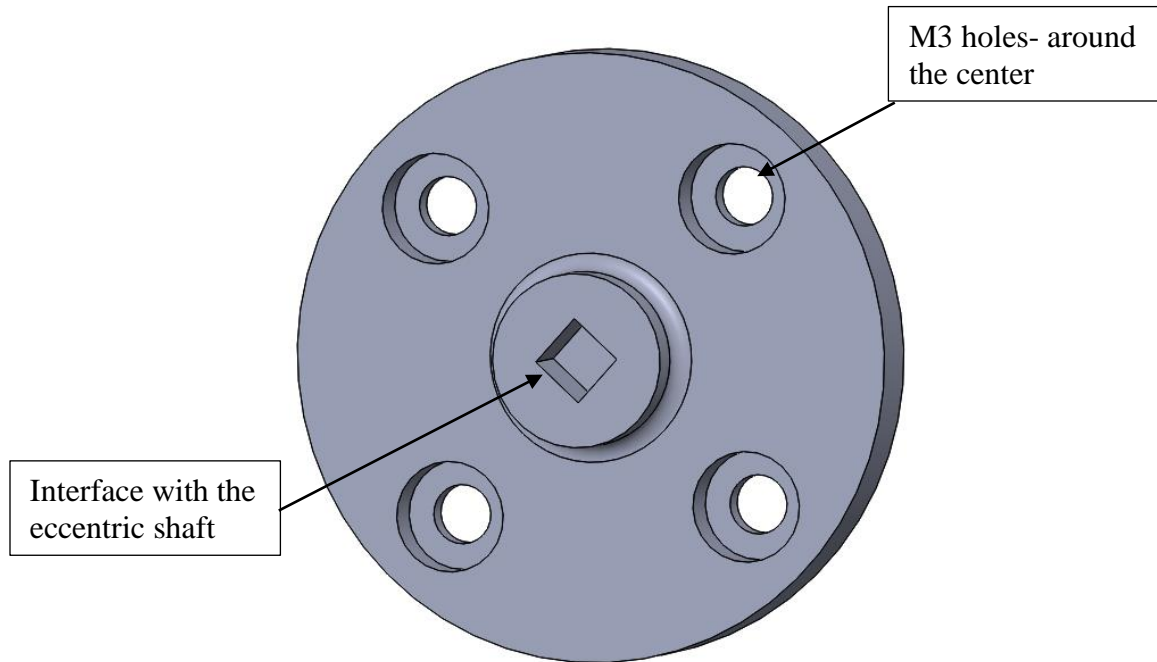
Representation of the motor shaft that will transfer torque from the motor to the eccentric shaft.
